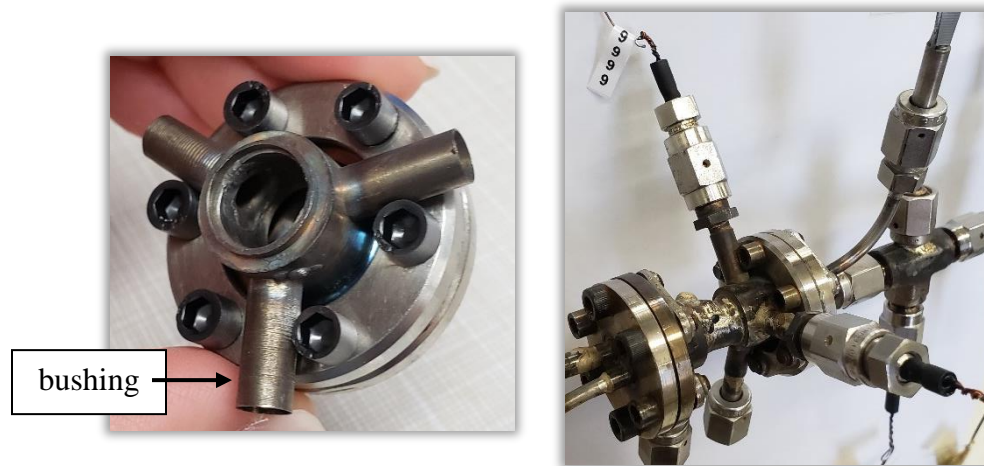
Weld necks adapted for temperature and pressure measurements.
